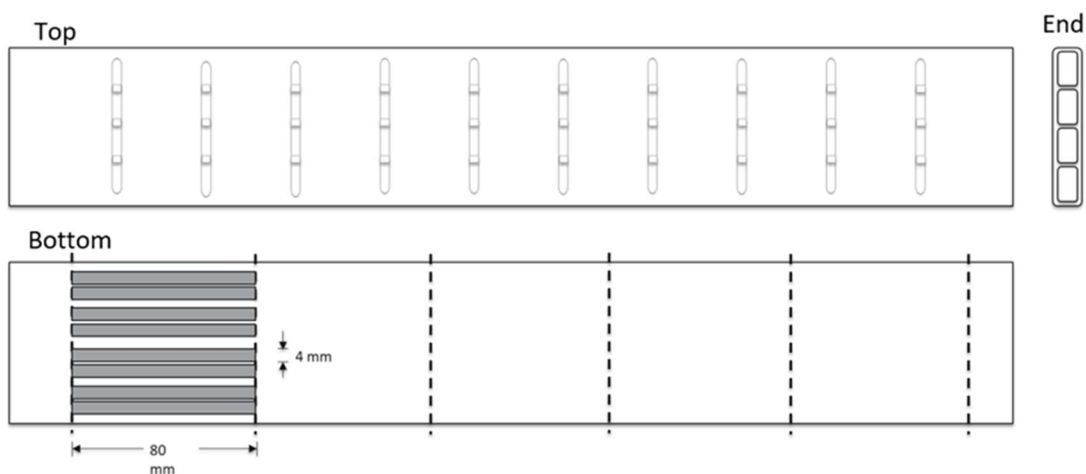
Diagram of a 38% MMA manifold component (LG designation M3) with section lines to indicate where samples were obtained. The bottom view shows where eight specimens were obtained from the abrasive slicing process.
